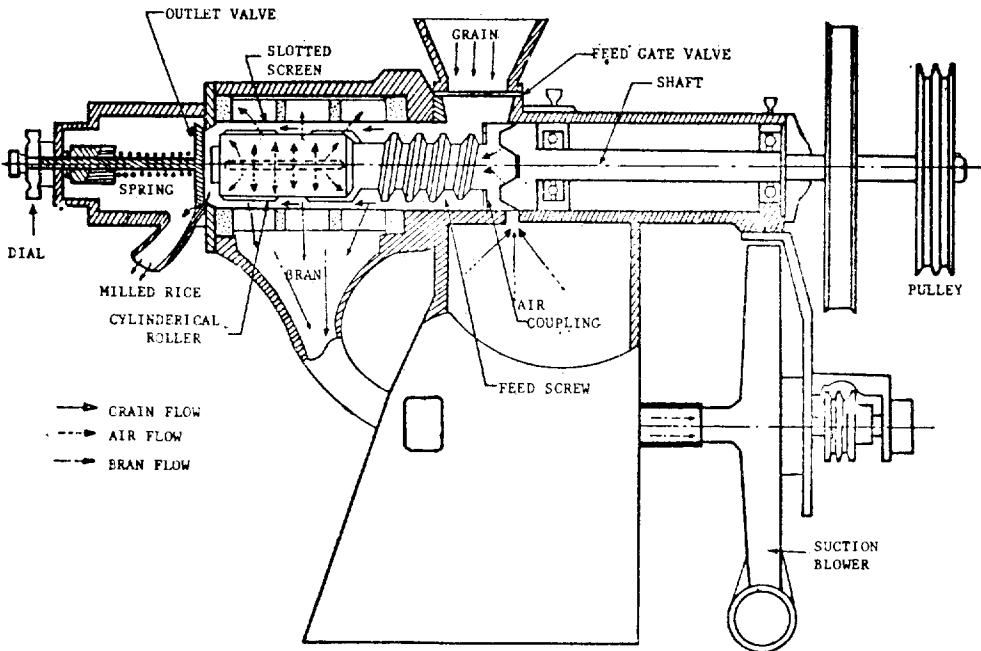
Schematic drawing of friction type whitening machine used for experiment.
